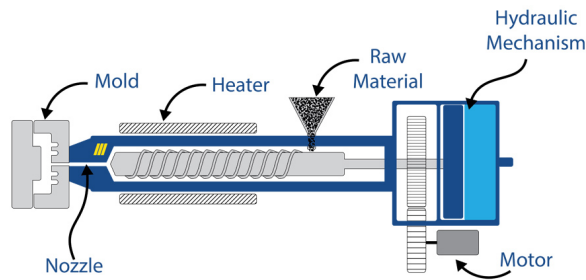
A standard injection moulder is consisted by a heater and a mould cavity. A plastic injection moulding can be used for the production of both thermoplastic and thermosetting plastic materials. Reprinted," How hydraulics is used in injection moulding machines by Walker Gross © <http://www.rg-group.com/blogs/how-hydraulics-is-used-in-injection-moulding-machines/>
